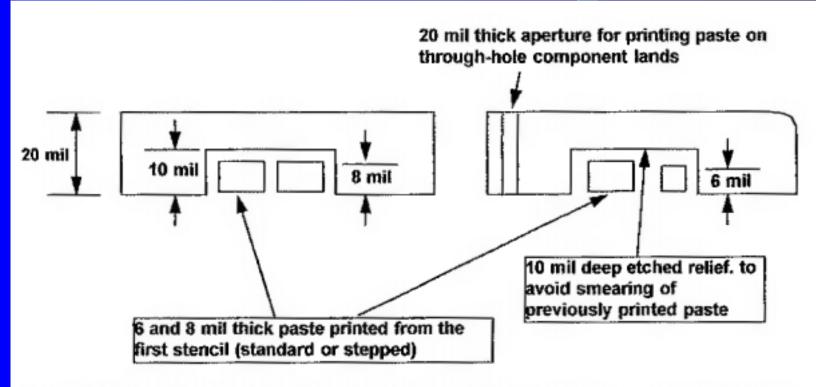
Schematic of a step stencil for printing on through-hole lands in a mixed assembly.
